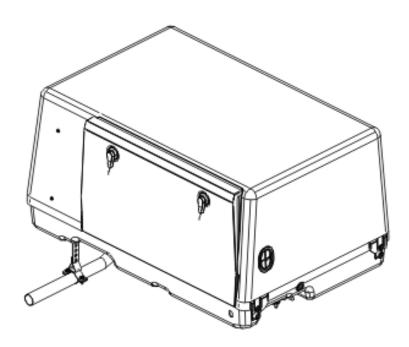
TYPICAL TAILPIPE INSTALLATION
